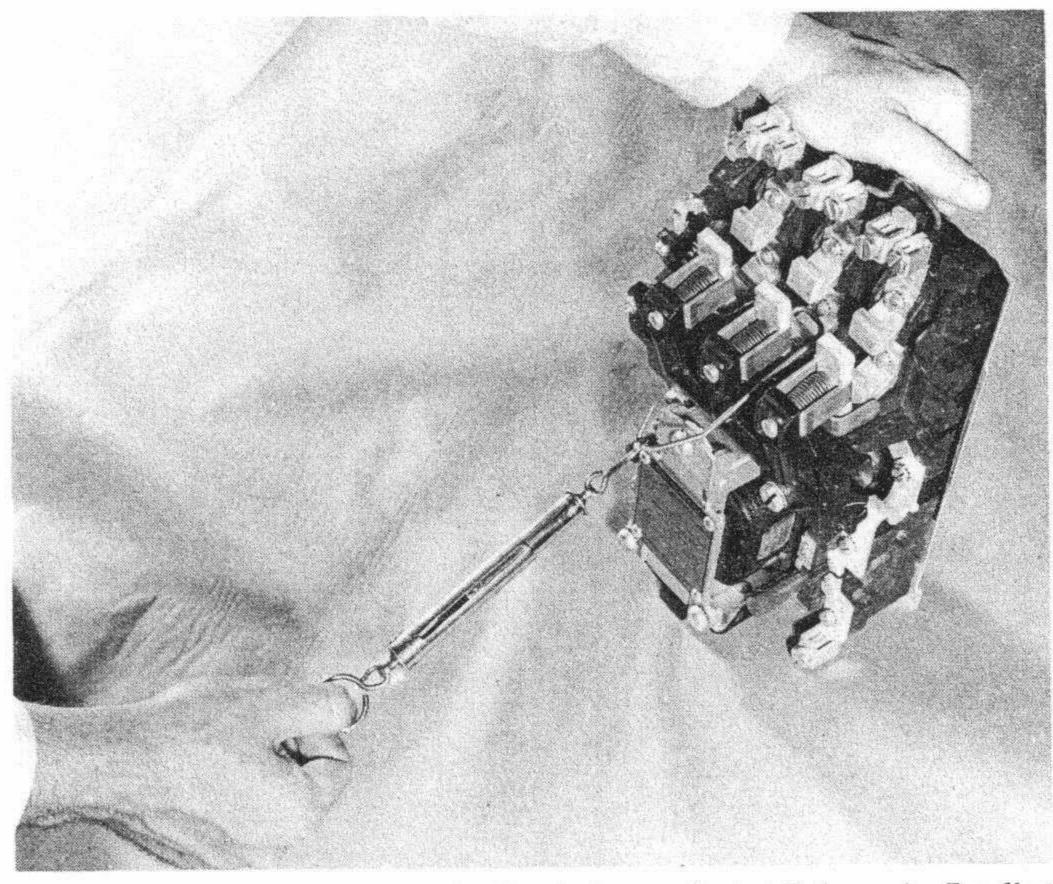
Contact Pressures May Be Checked on a Spring Balance by Reading the Scale When the Contacts Separate. The Pull Should Be in a Direction Perpendicular to the Contact Surface
